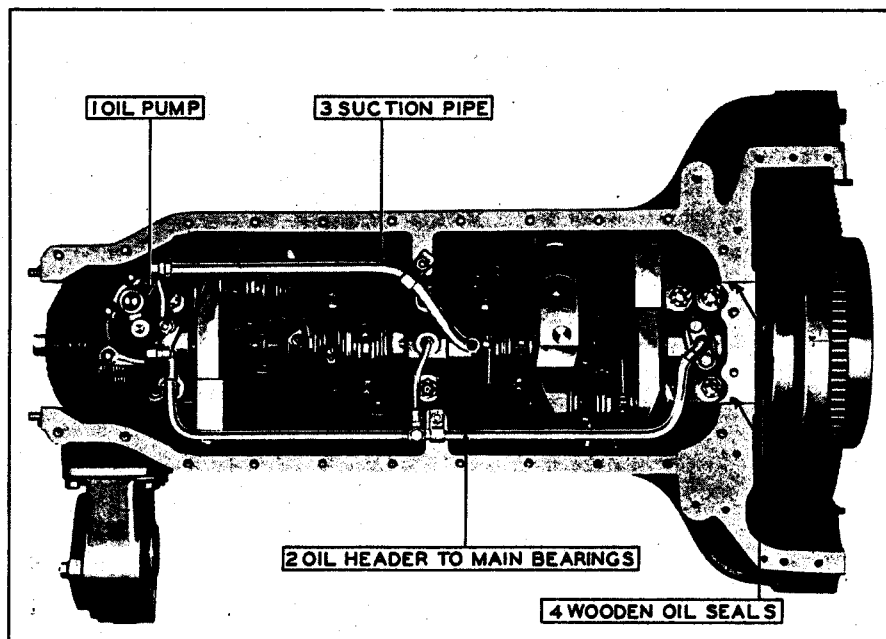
Bottom View of Engine, Oil Pan and Flywheel Cover Removed
